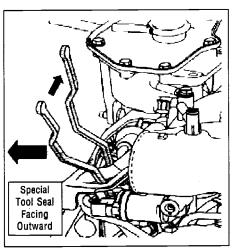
Insertion of Special Tool through the upper opening for Rear Bolt (RH)
